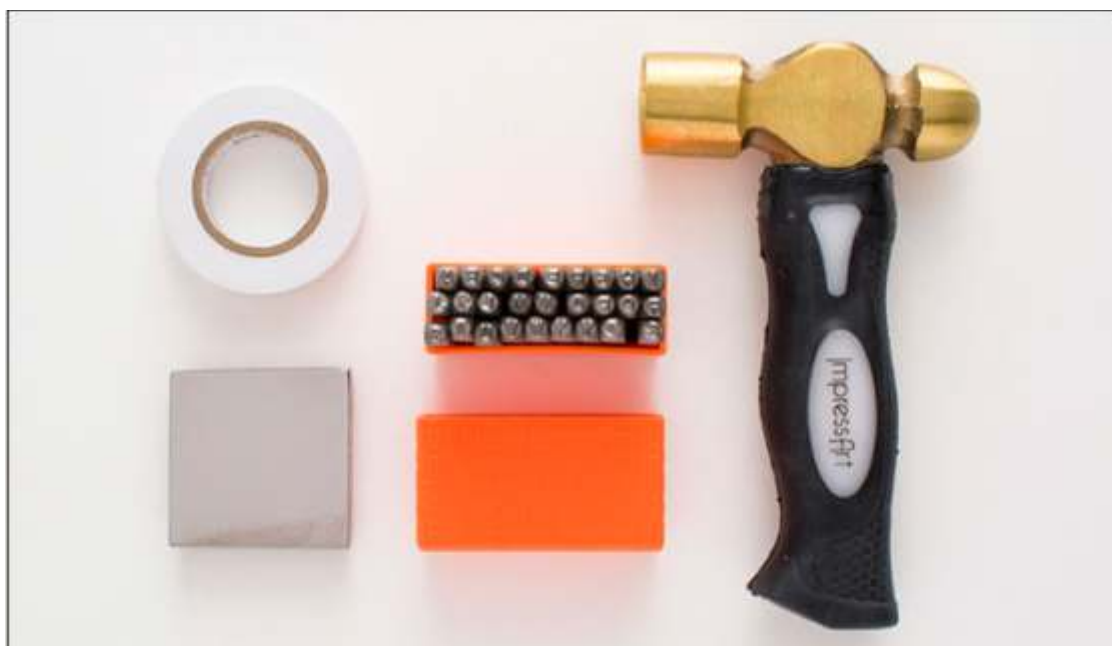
Metal stamping – complete metal stamping kit and how to stamp metal
